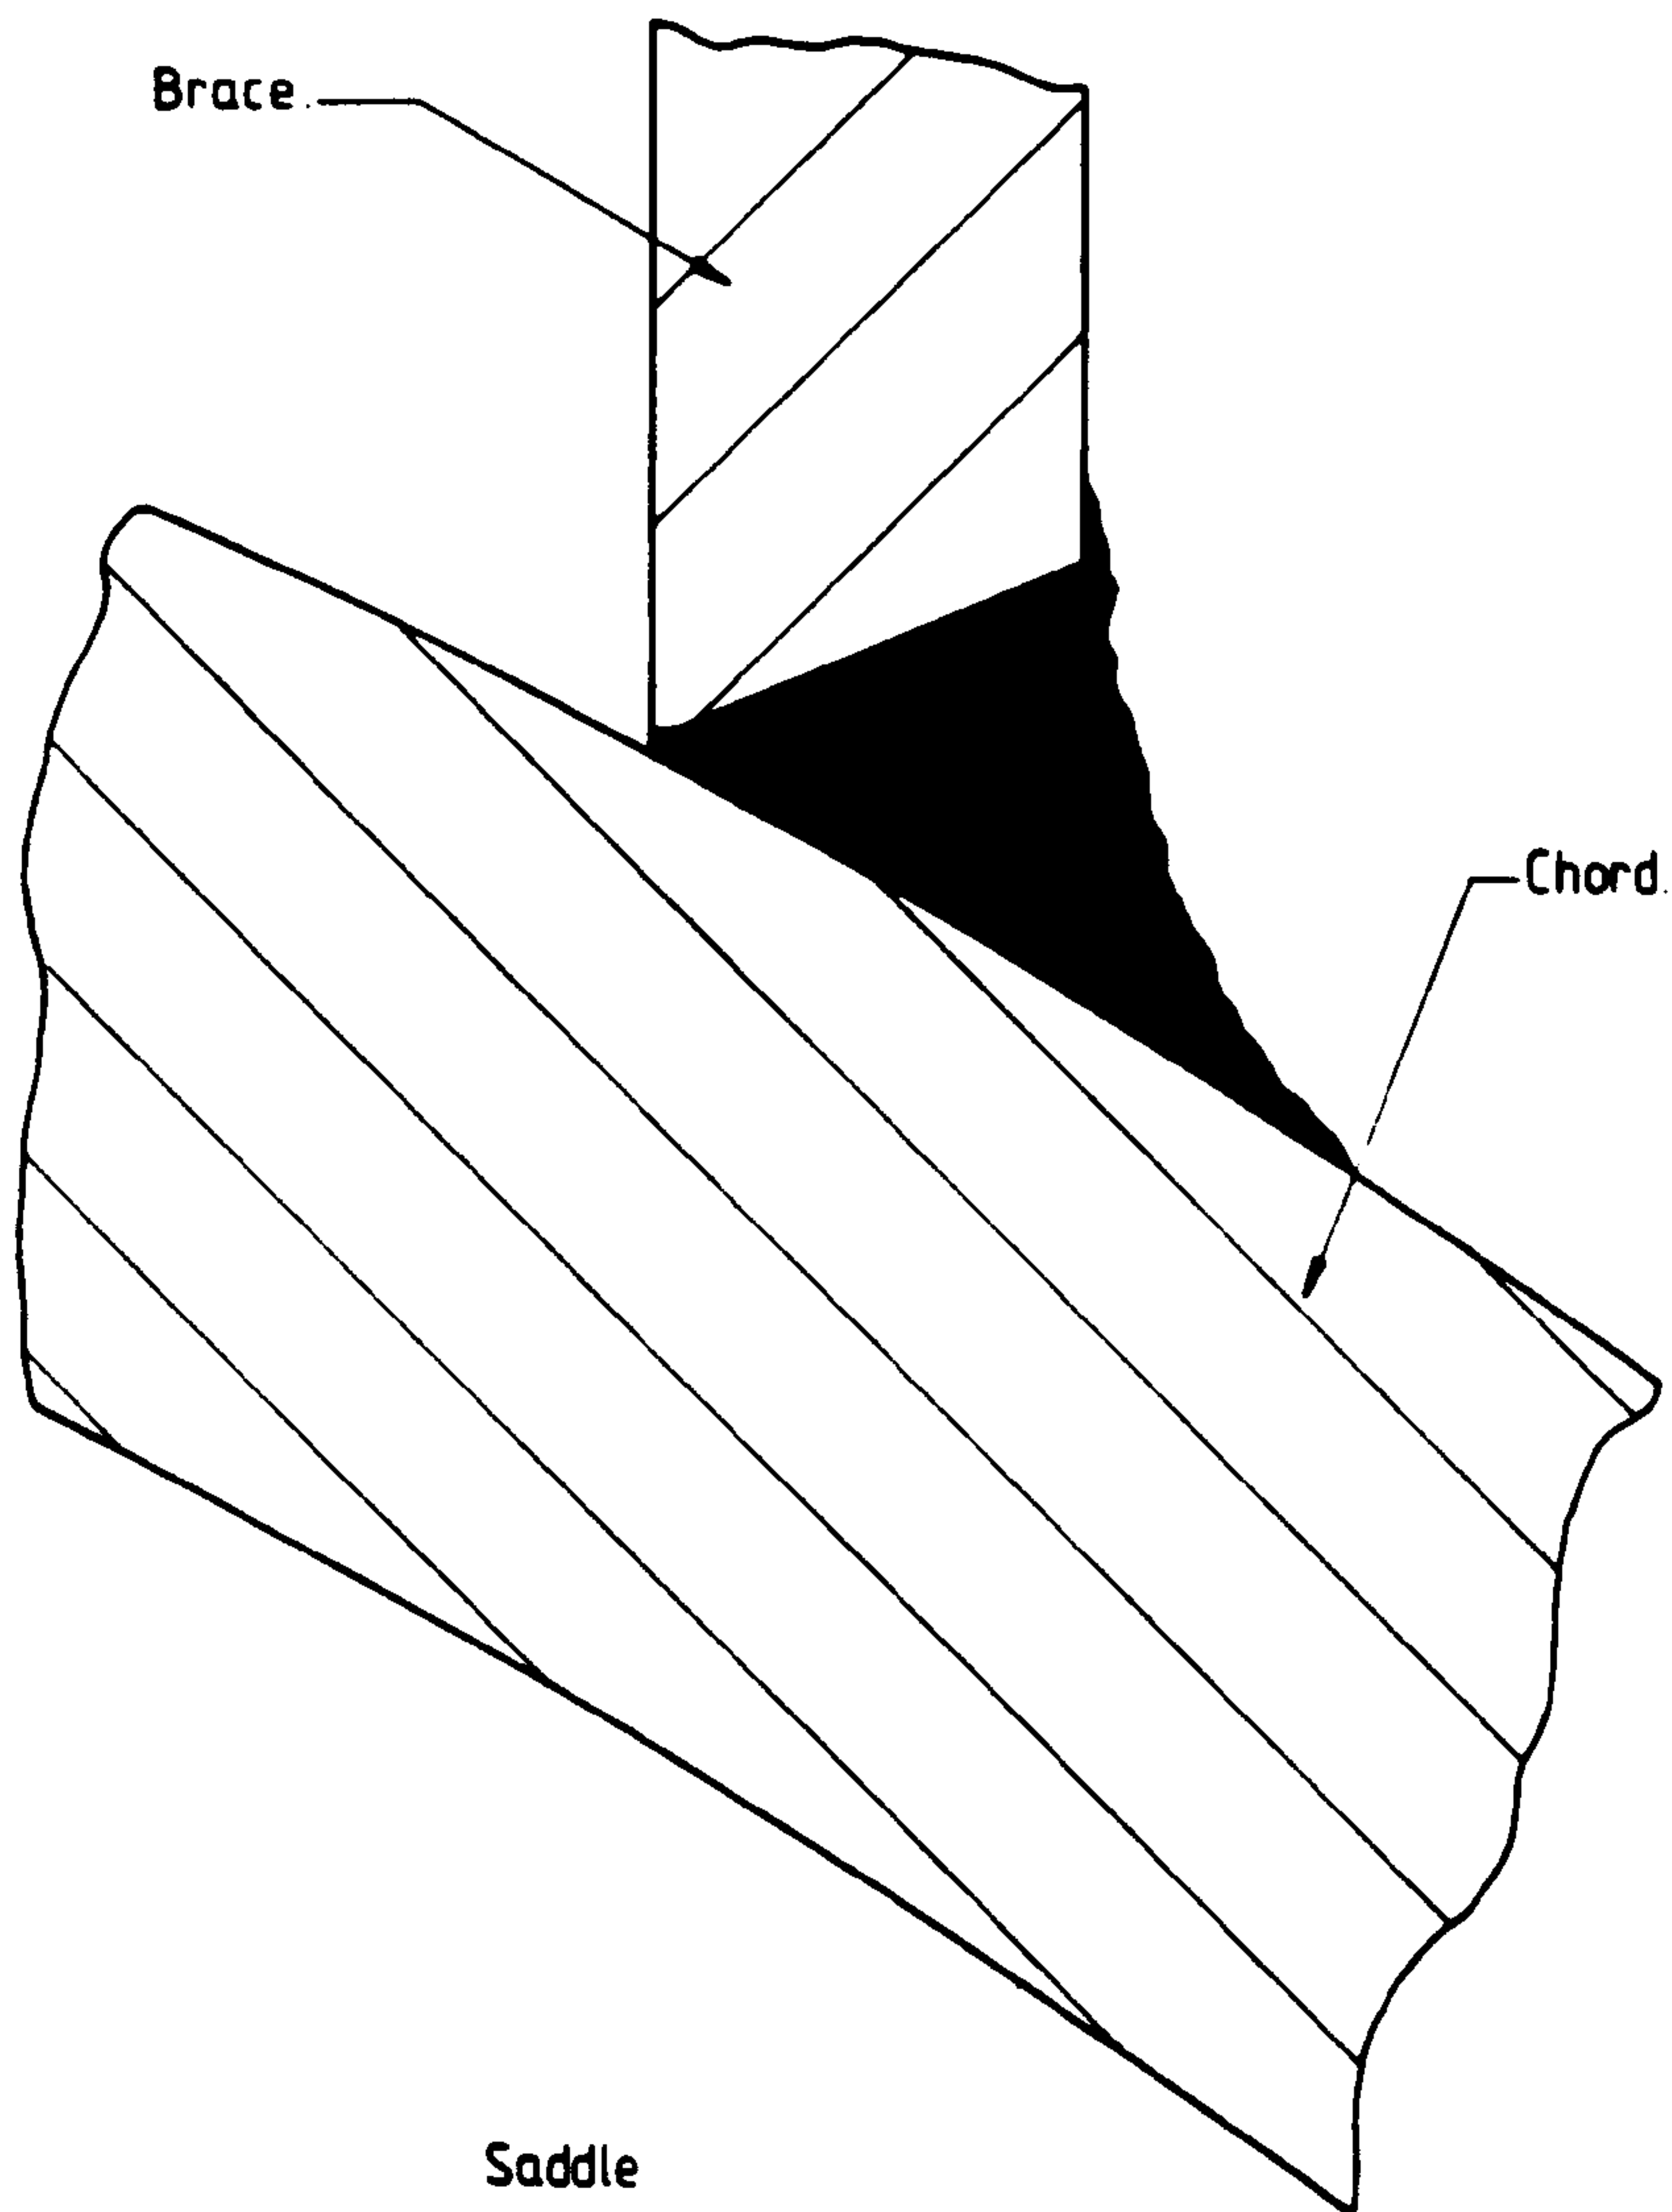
Schematic showing an ideal weld profile can be achieved, a minimum of 10-12 weld runs would be needed for such a profile
